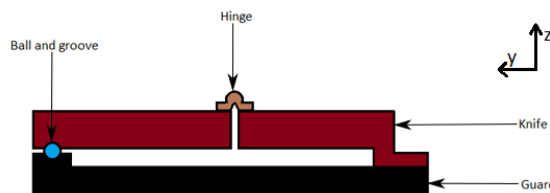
Friction reduced using ball & groove at the back end and a hinged knife
